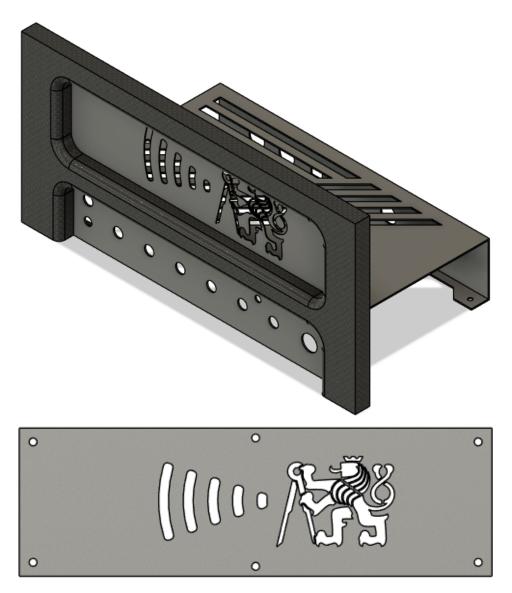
Designed metal chassis enclosure with the front CTU logo plate.
